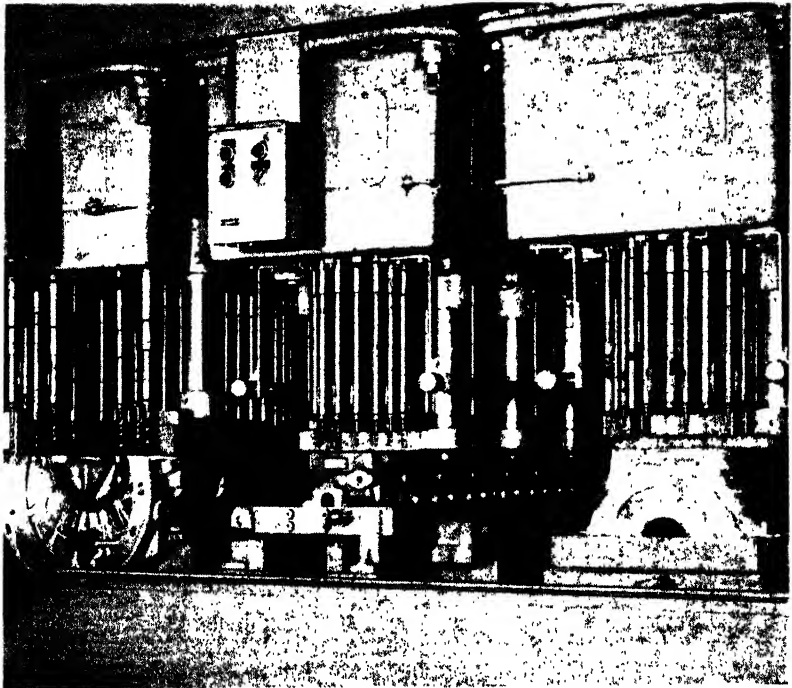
Another Special Machine Designed for Drilling, Countersinking, and Tapping a Hole at an Angle in the Hydraulic Cylinders for Rear Wheels
